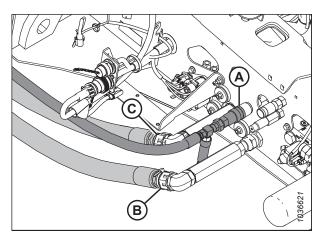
Header Drive Hydraulics – Hard-Plumbed Fittings
